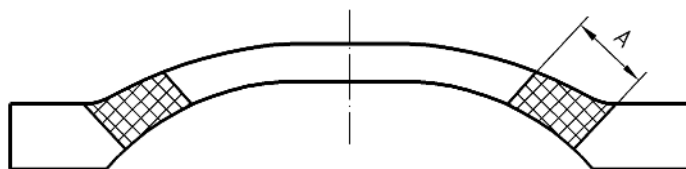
Typical casting section showing required radiographic examination of dished cover
